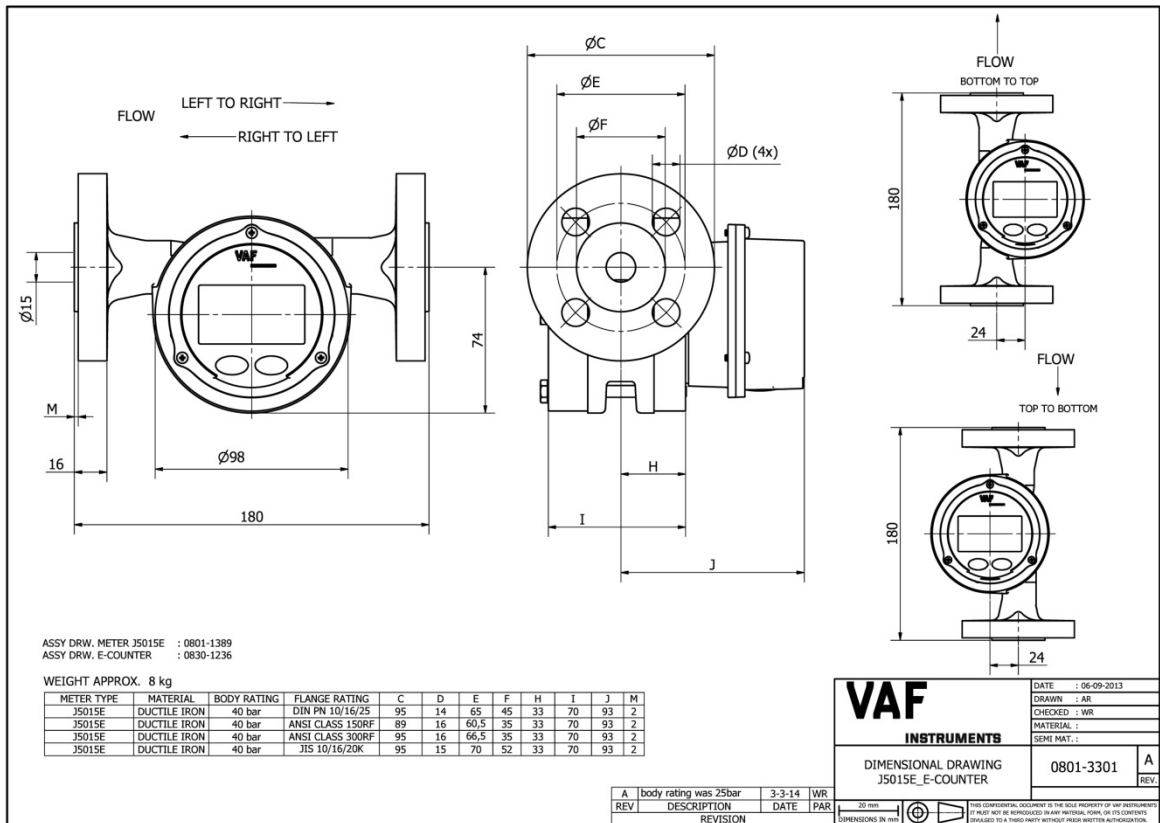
Drawing 0801-3301 – Dimensional drawing J5015E E-counter
